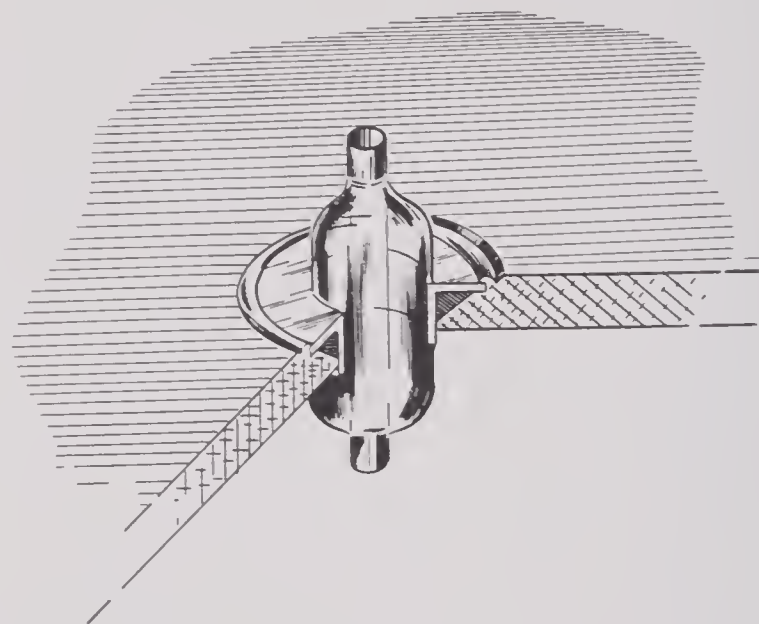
A view of a hollow glass-metal terminal seal installed in a Dural bulkhead with an O-ring gasket. A wire lead is first brought out through the hole and then soldered to the insulated metal tube.
